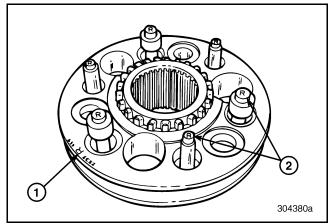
Synchronizer Pins and Sliding Clutch Showing "R" Marks (Preload Springs Removed for Clarity)
